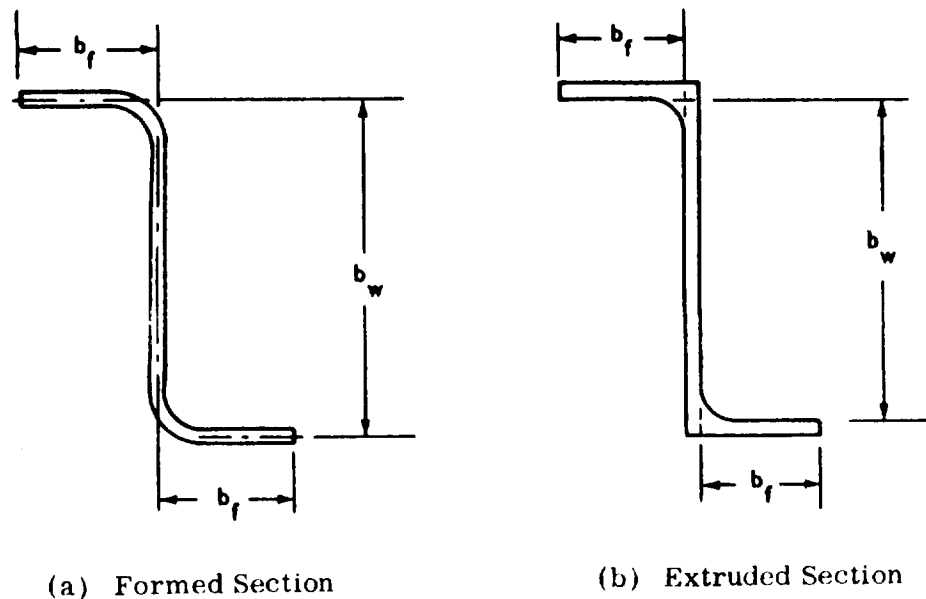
TYPICAL DIMENSION FOR FORMED AND EXTRUDED STIFFENERS.
